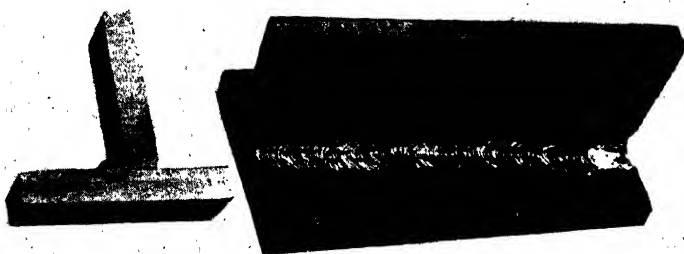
This horizontal-fillet weld was deposited with the electrode pointed too directly on the lower plate. Note the undercut at the joining of the weld with the upright plate and the wastefully long leg of the weld on the horizontal plate. The joint is both weak and wasteful.
